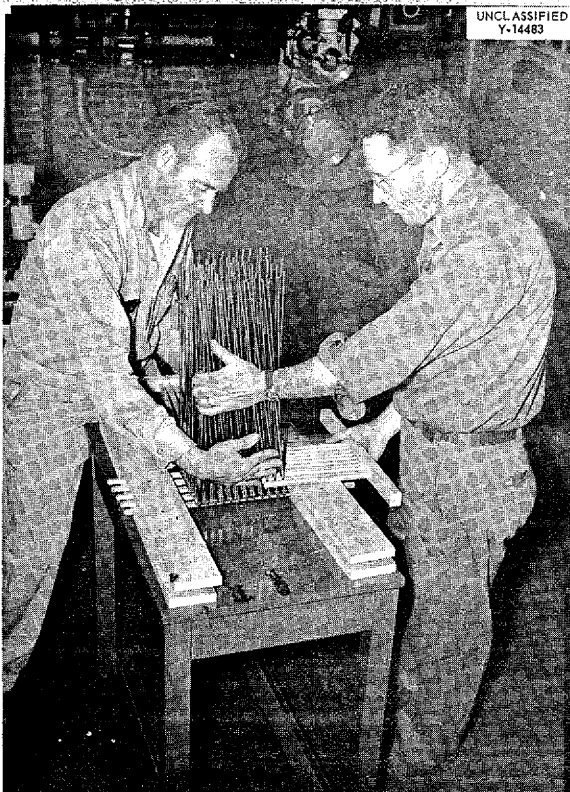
Early Stages of Assembly of NaK-to-Air Radiator.
